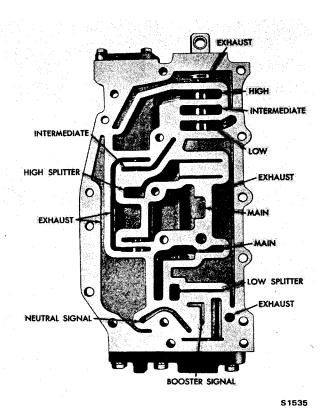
, Control valve body (5660, 5860) -oil passages
